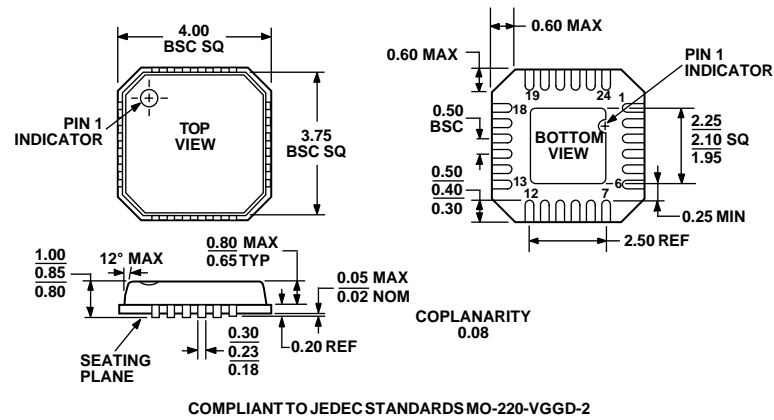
24-Lead Lead Frame Chip Scale Package [LFCSP]
